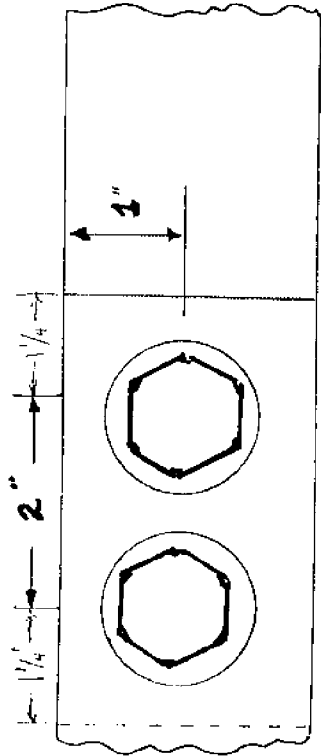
Rubber conveyor belt edging showing 3/8-16 nylon bolt pattern with washers.
